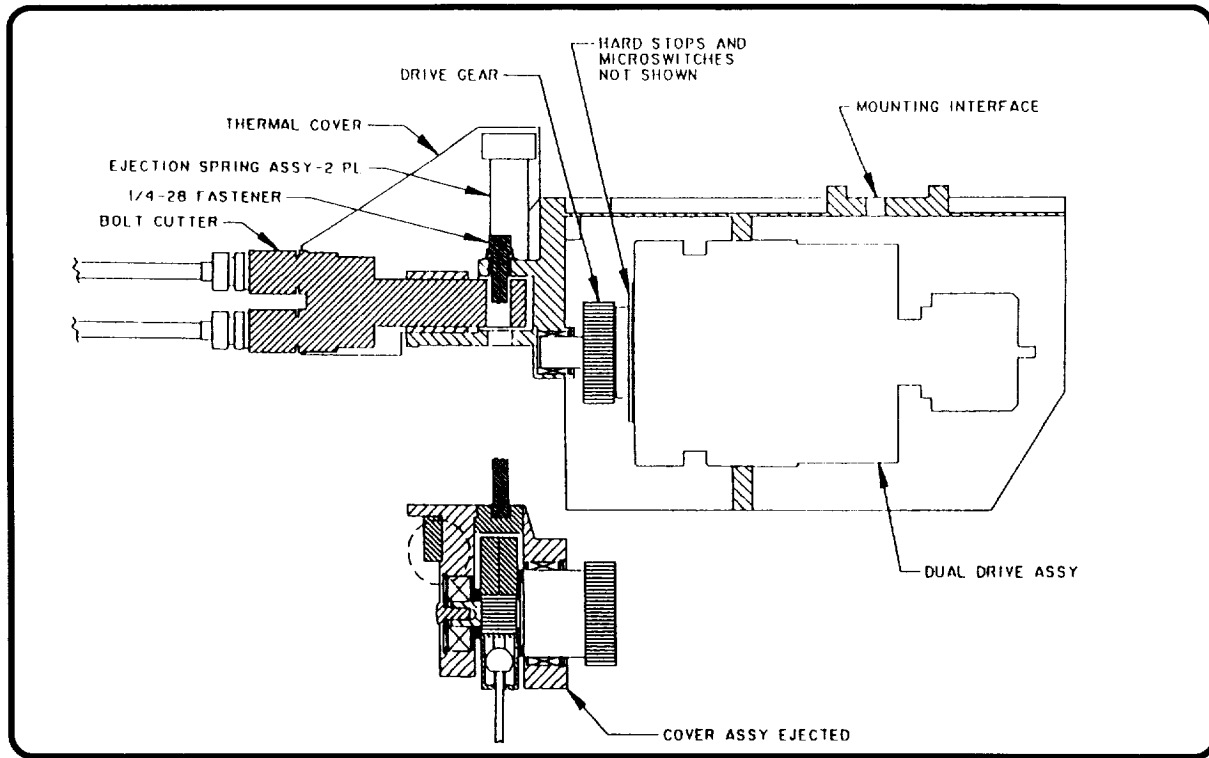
CROSSSECTION VIEW SHOWING COVER EJECTION
